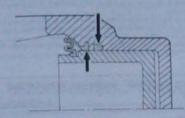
Correct positioning of the piston and dust seals in the caliper—pre-September 1985 models (Sec 9)
